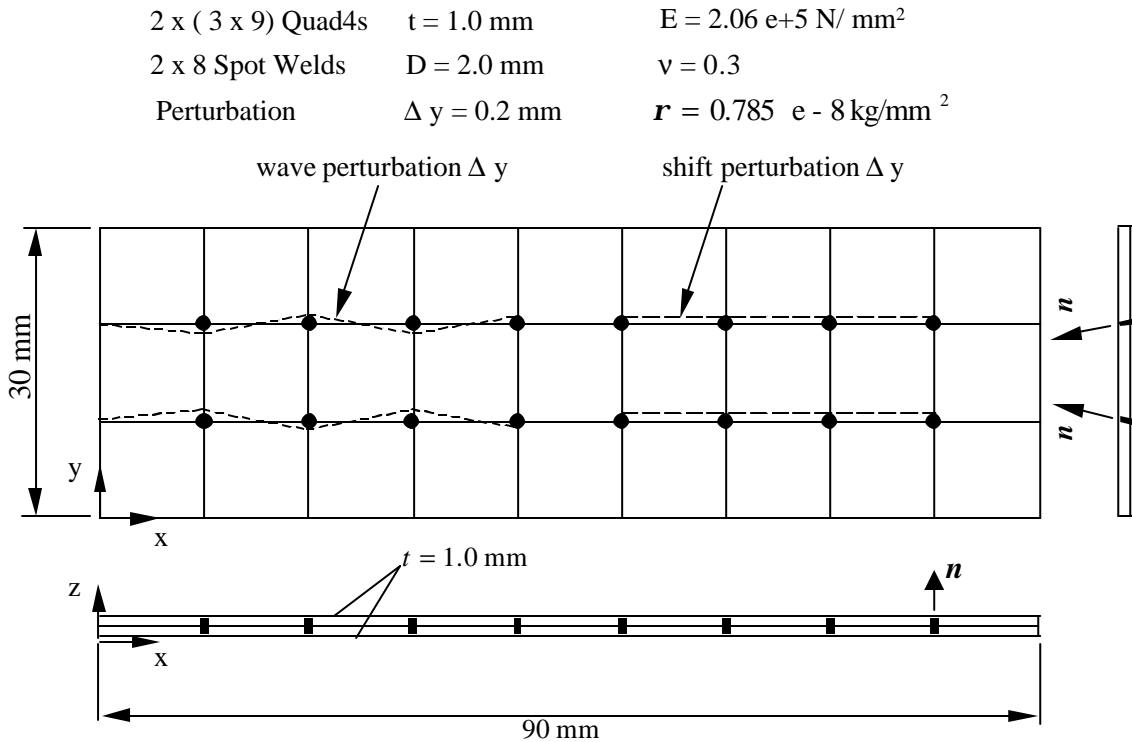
Two Plates Connected with 16 Spot Welds
